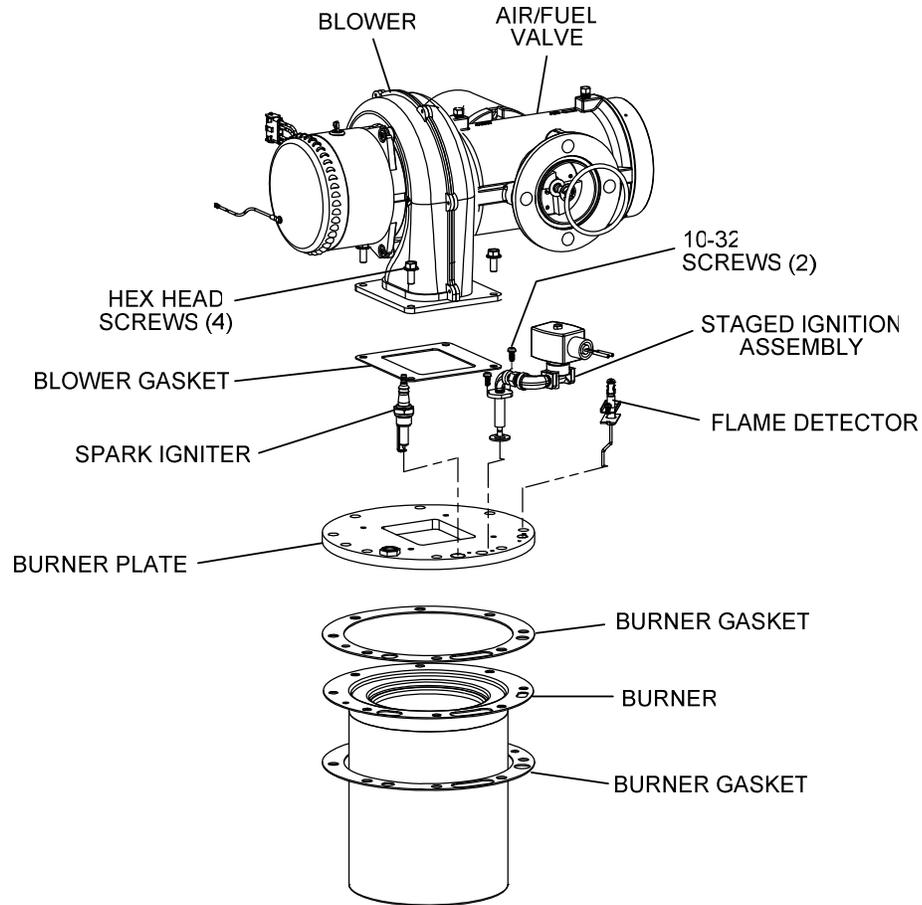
Benchmark 1.5LN Burner Assembly Exploded View
